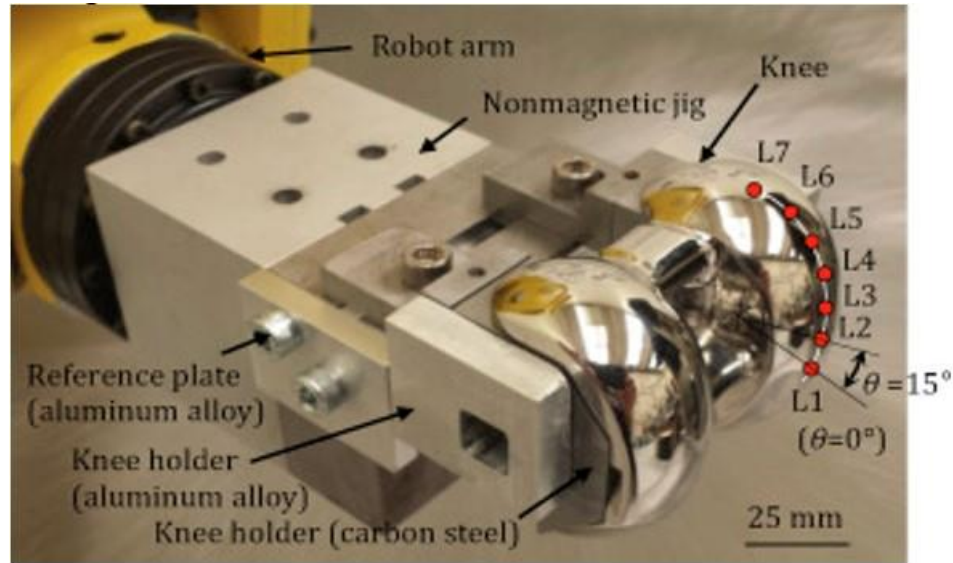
Tool holder designed to be compatible with the five-axis robot arm [40]
